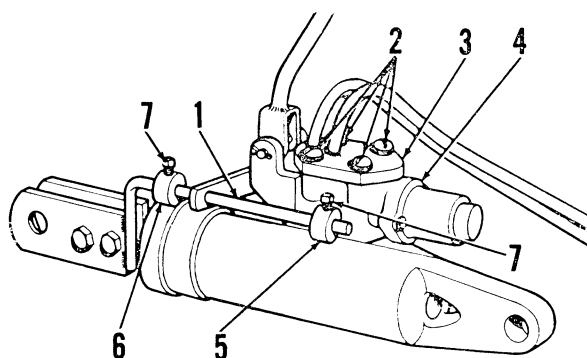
Pony hydraulic cylinder and control valve assembly.
